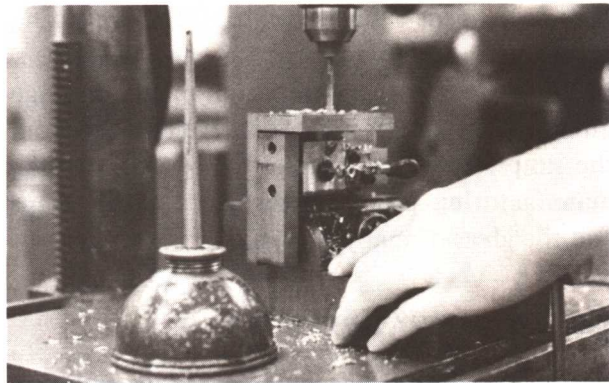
A drill jig is used to accurately locate a hole in a large number of parts that are the same.
